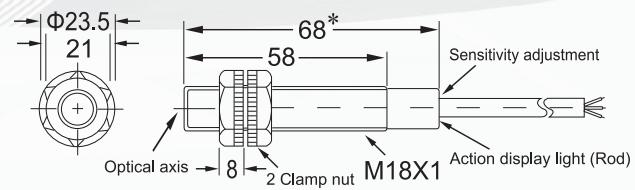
## PHOTO ELECTRIC SENSOR - 18mm (Metal) (Diffuse & through Beam)
